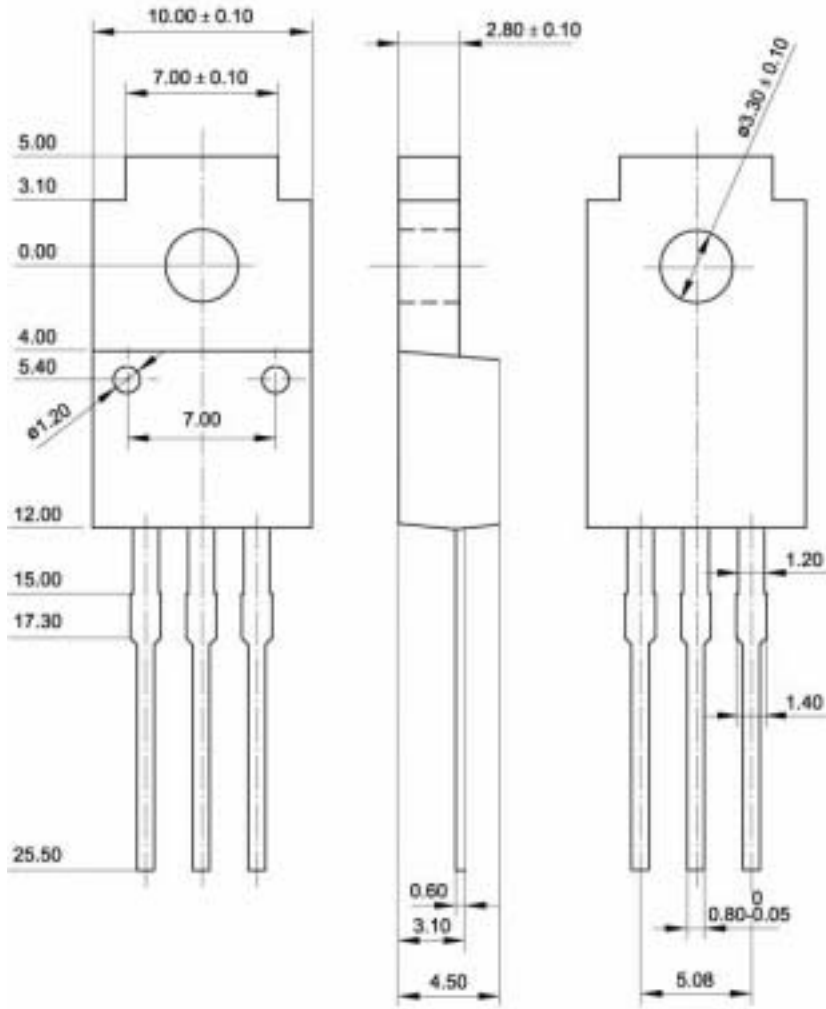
Outline dimensions (unindicated tolerance: ± 0.15 mm)
